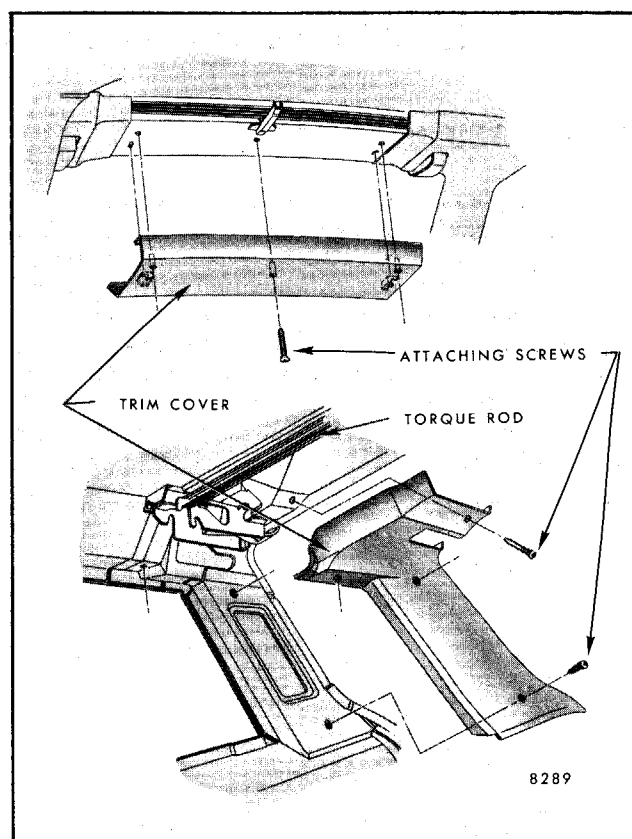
Torque Rod Trim Removal - "H-15" Styles
